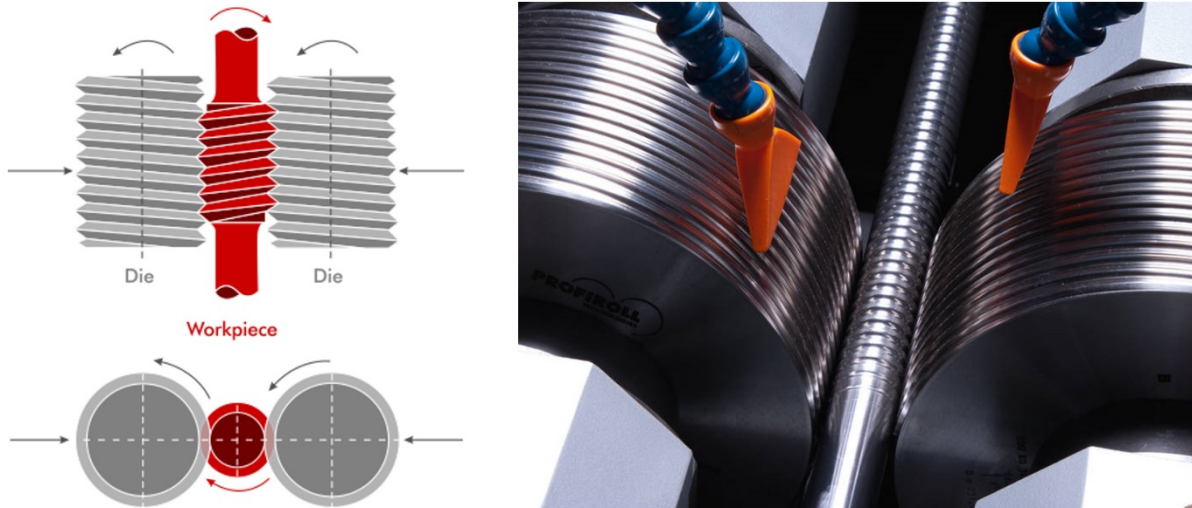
Principle (left) and real appearance (right) of the thread rolling [5], [6].
